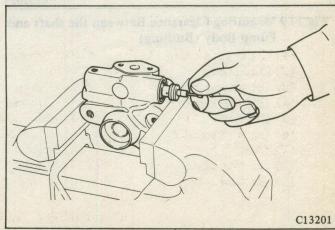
Removing the Flow Control Valve Assembly and Spring
